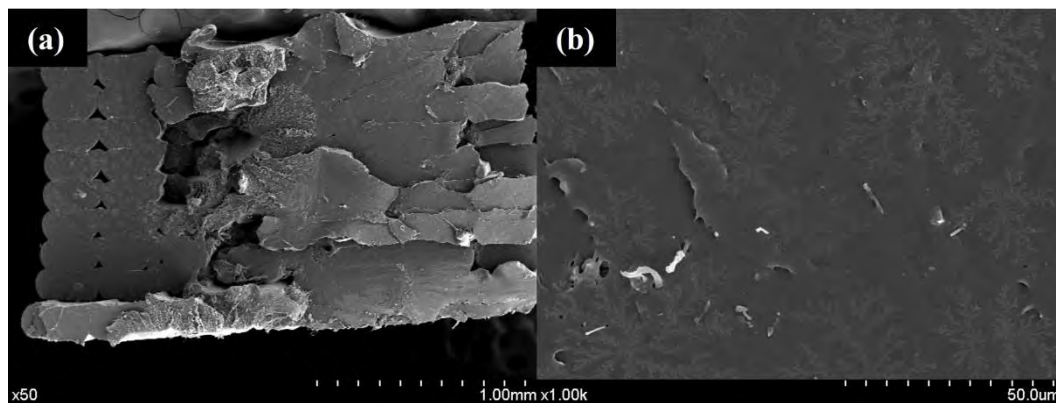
Fracture surface SEM of rTPU 3D-printed specimens after tensile test.
